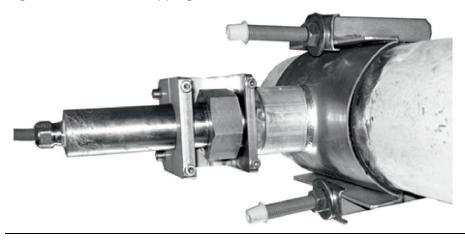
Installation example with tapping saddle DN100...DN400
